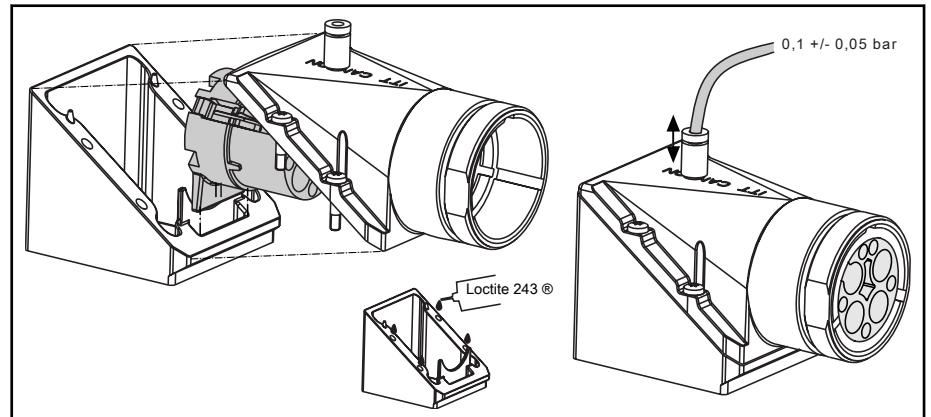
Mounting SUP-M02-MSK to RLS1300
